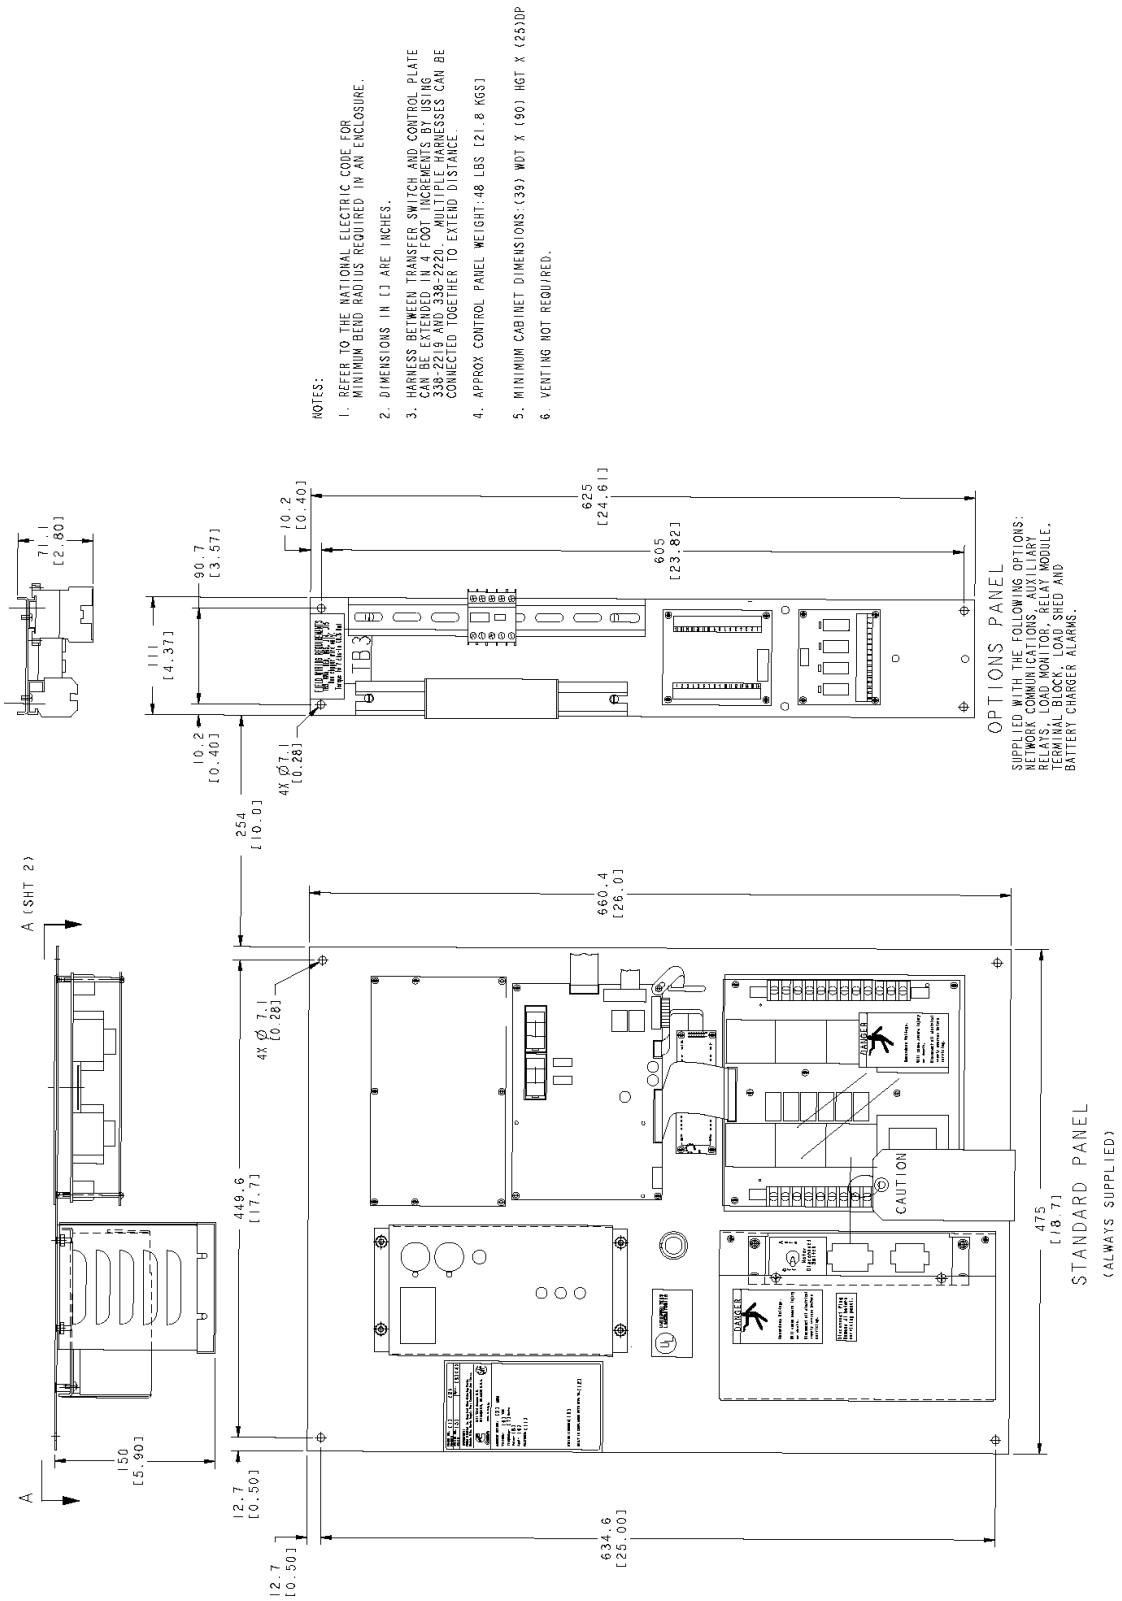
TYPICAL OPEN CONSTRUCTION
